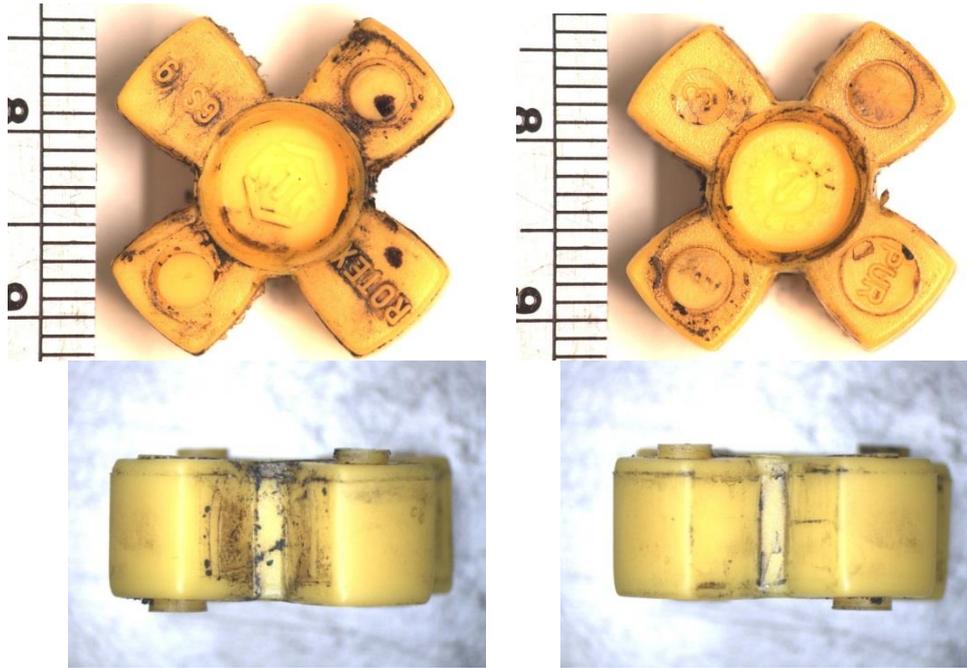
The two upper images show spider end-faces with marking. The lower left image shows damaged prong loaded faces, that had contacted the actuator coupling. The lower right image shows undamaged prong loaded faces, that had contacted the motor coupling.
